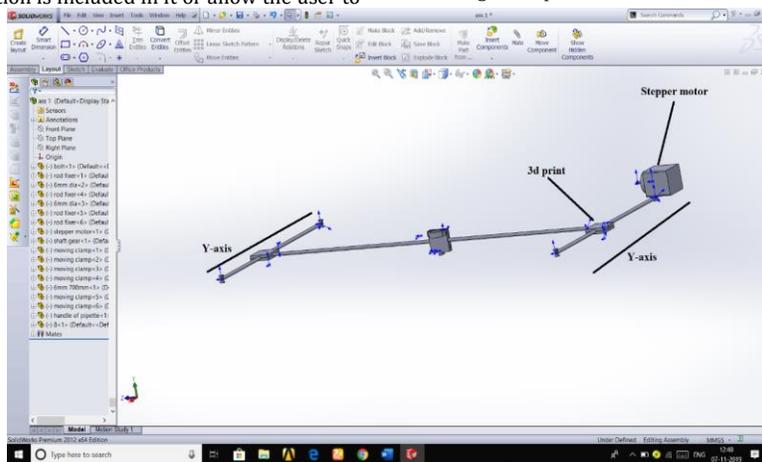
The basic machine axes of the system which is based on the Cartesian coordinate system with a stepper motor mount
